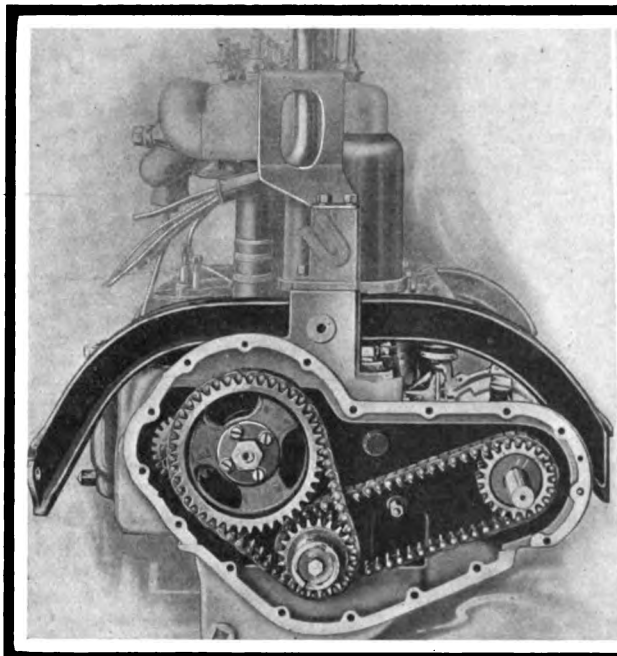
Front view of Cadillac motor, showing silent-chain driven pump and cam shafts
